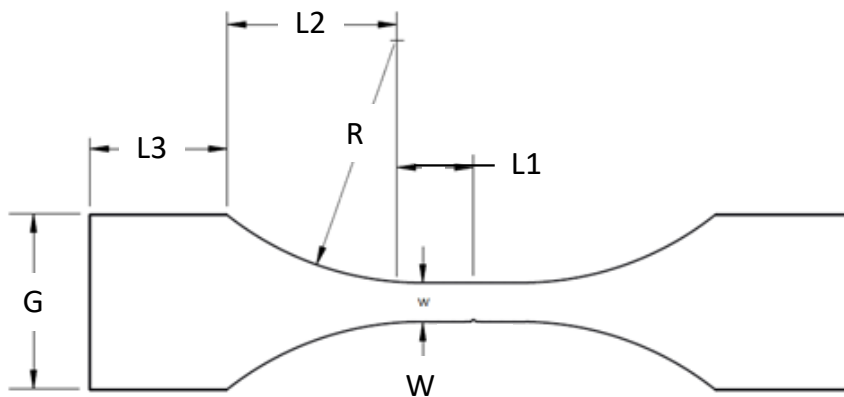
ASTM E466 Sheet Type Specimen [87].
